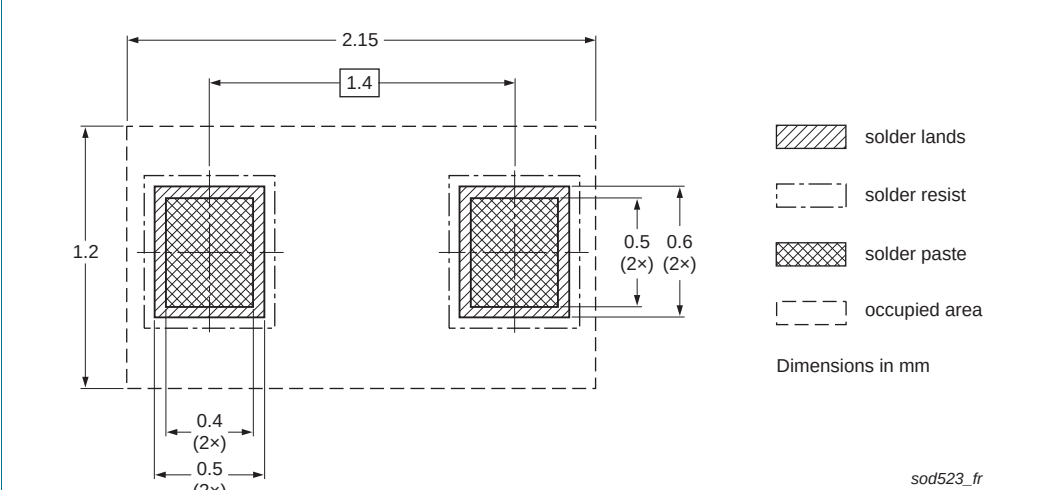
Reflow soldering footprint BAS516 (SOD523/SC-79)
